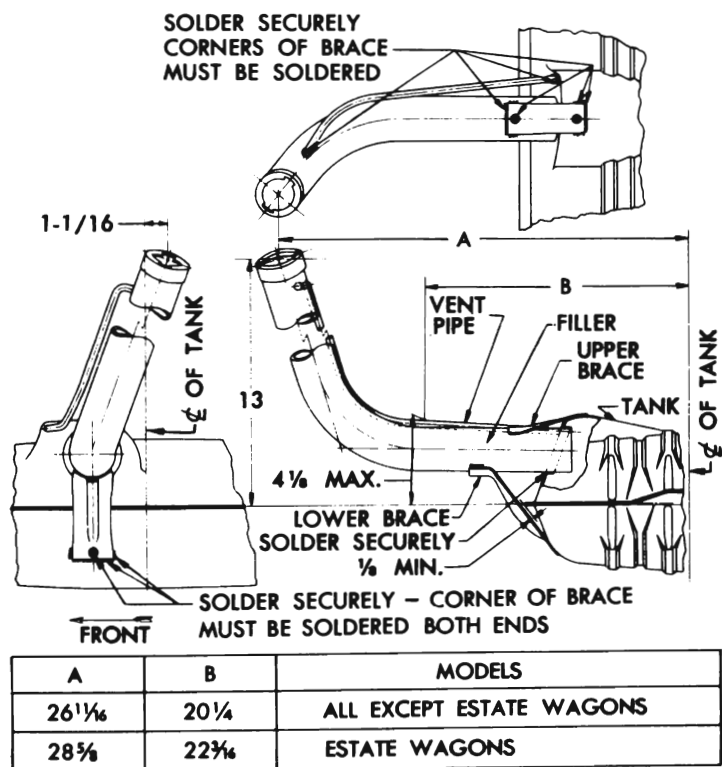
Location Dimensions for Gasoline Tank Filler—All 1948 Models
